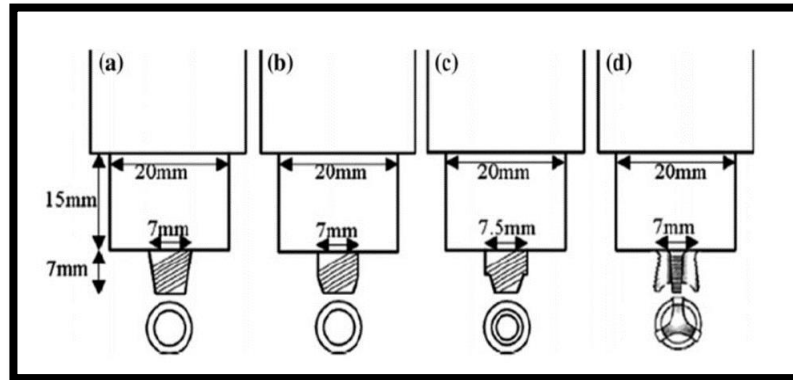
Pin profiles Geometries. (a) Conical threaded. (b) CylindricalConical threaded. (c) Stepped conical thread (d) Neutral flared triflate [26].
